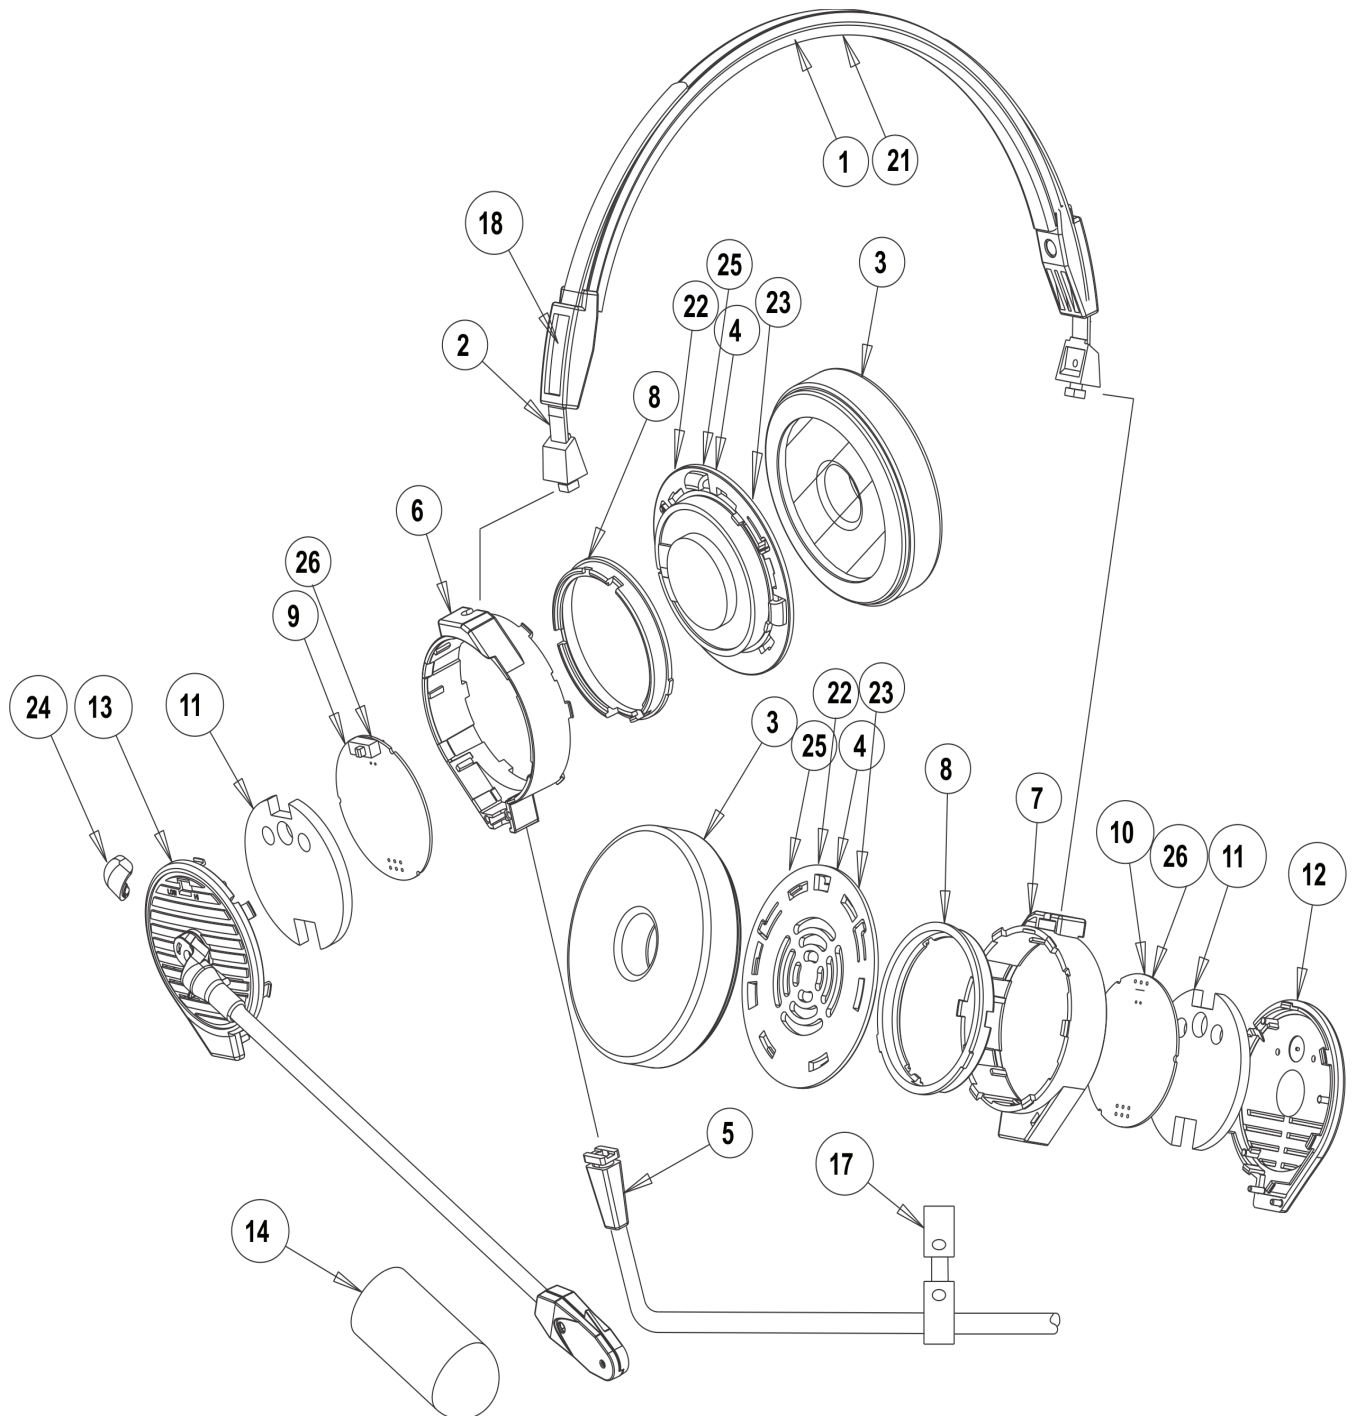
Airman 850 Headset, Dual Sided, Exploded View
